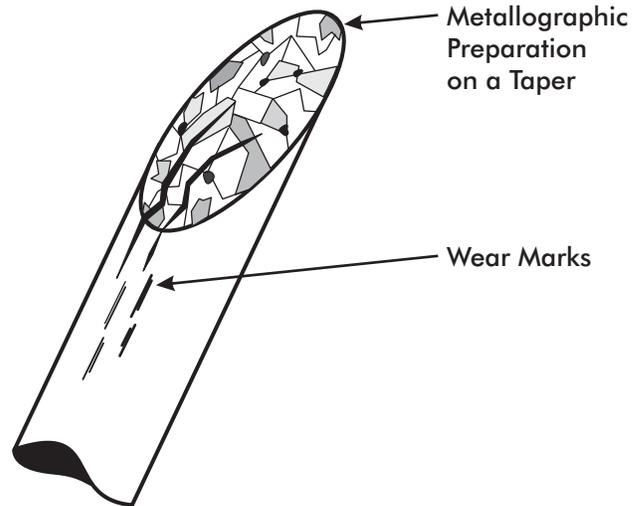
Rod Prepared on a Taper for SEM Viewing Using the Aluminum Foil Technique.
